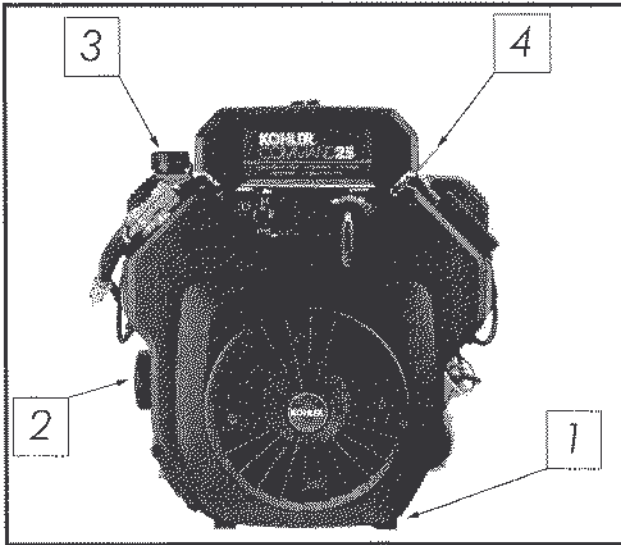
Changing oil and oil filter of Kohler Command 25 motor
